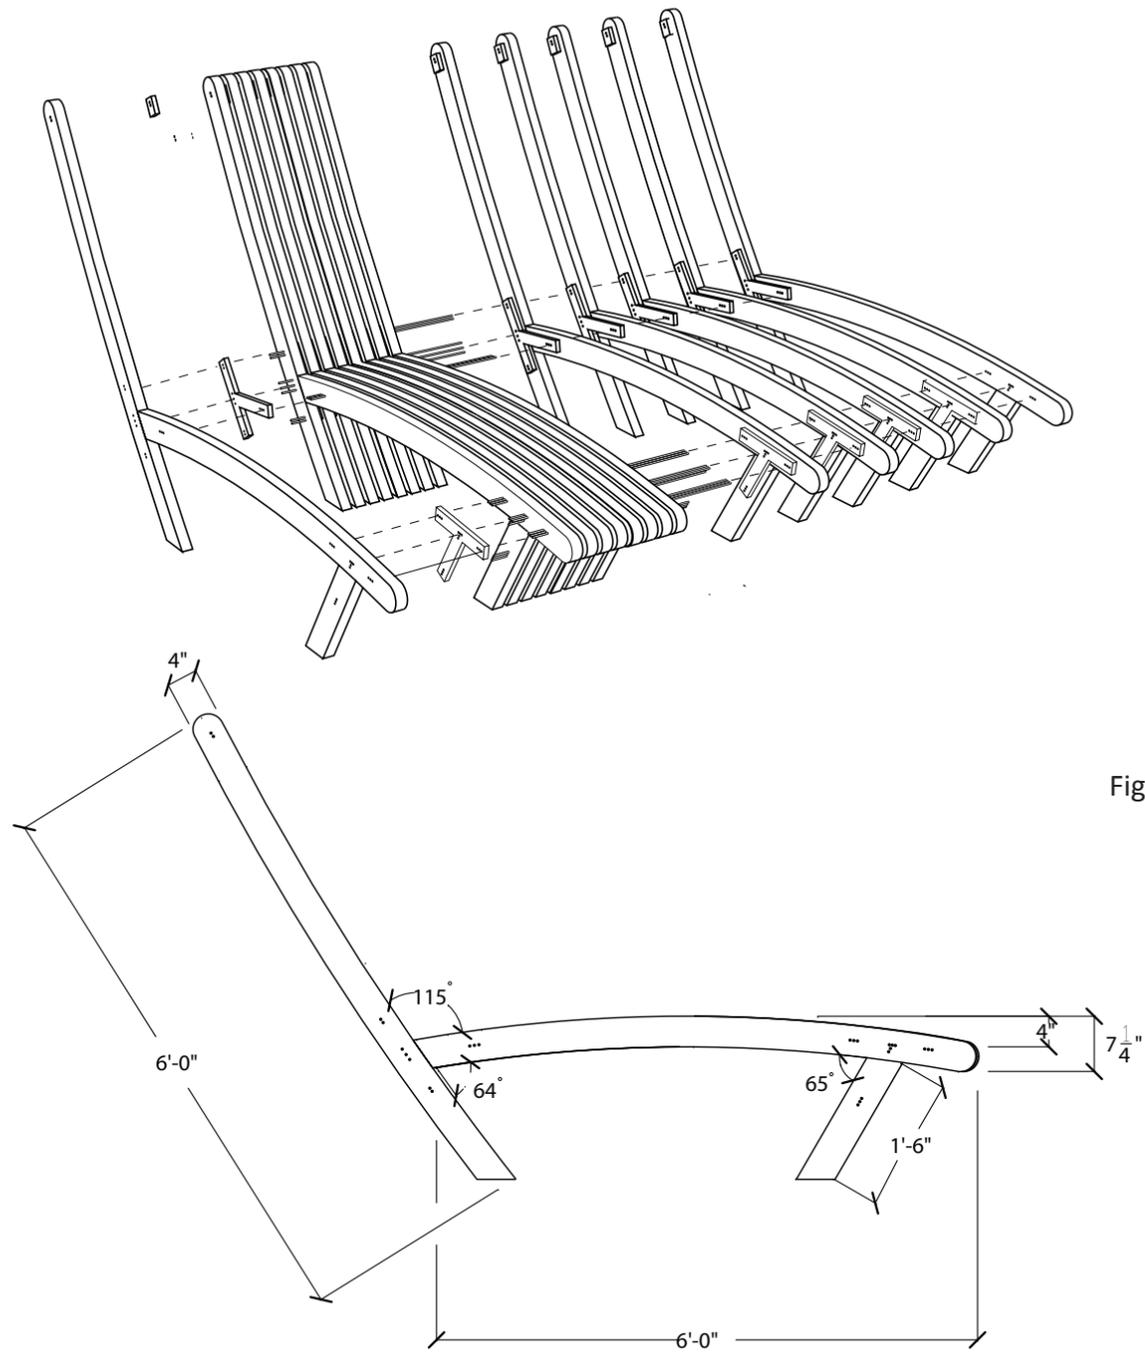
Axonometric of Vista Park wooden lounge chairs
